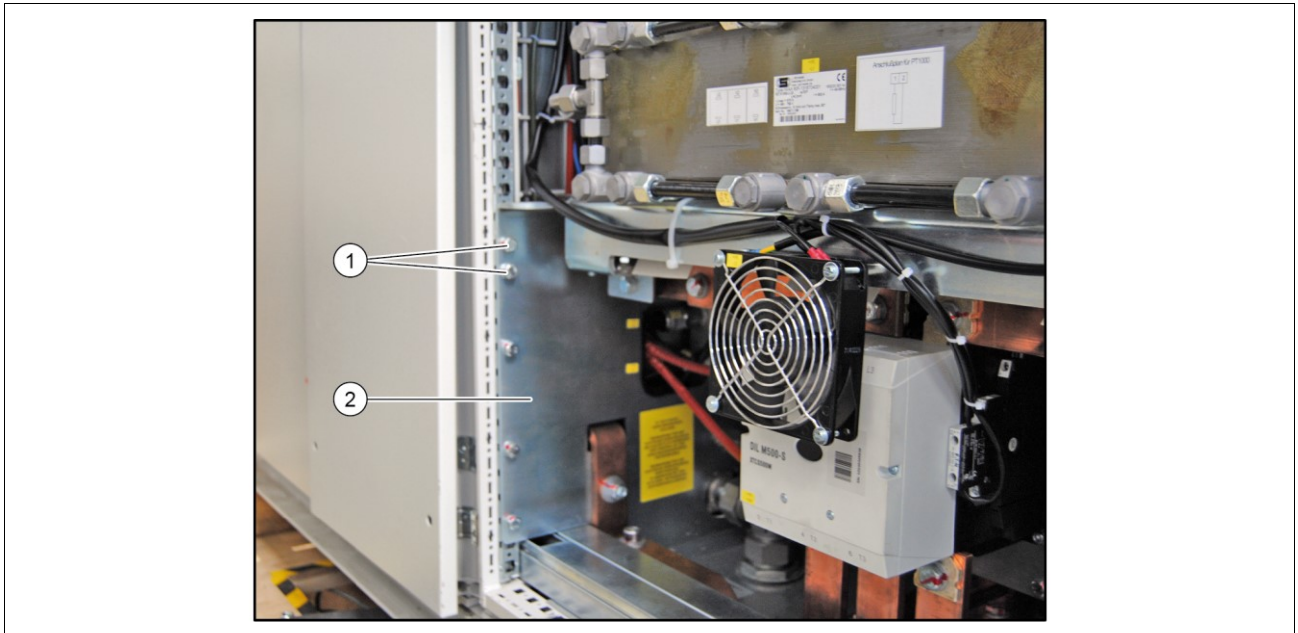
Screws for fixing the disassembling rails (here as an example for the line choke)
